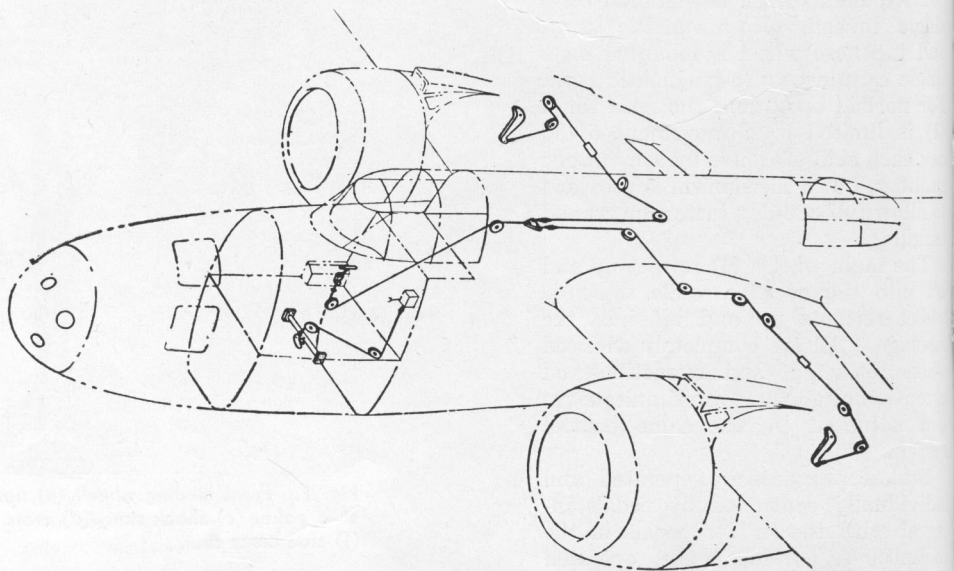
The landing gear mechanical release permits wheels to drop into the extended position. A bungee provides positive impulse to start the gear moving.
